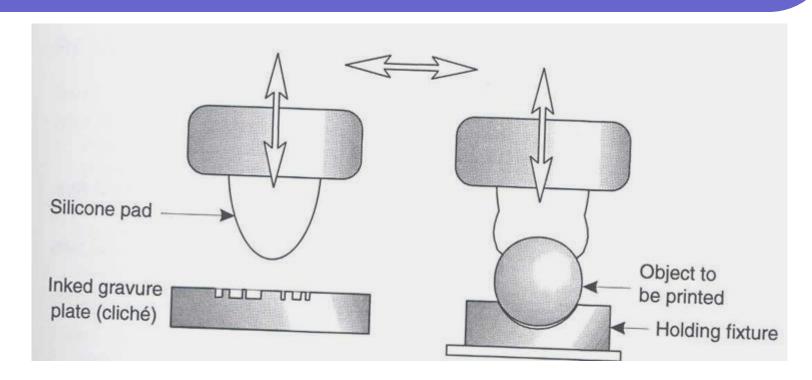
Pad printing is used to decorate irregularly shaped objects.
